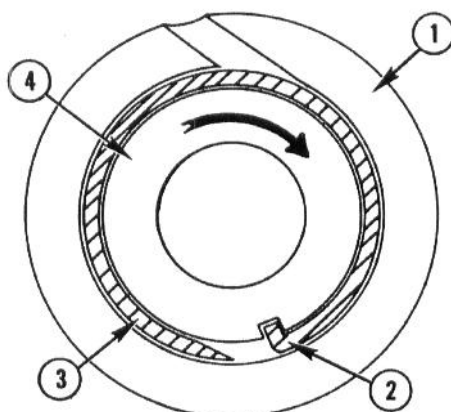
Direction of Bearing Rotation for Access to Wire Retaining Ring
